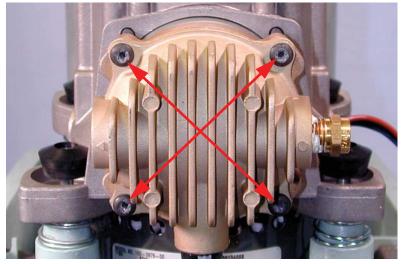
FIGURE H: COMPRESSOR HEAD SCREW LOCATIONS
